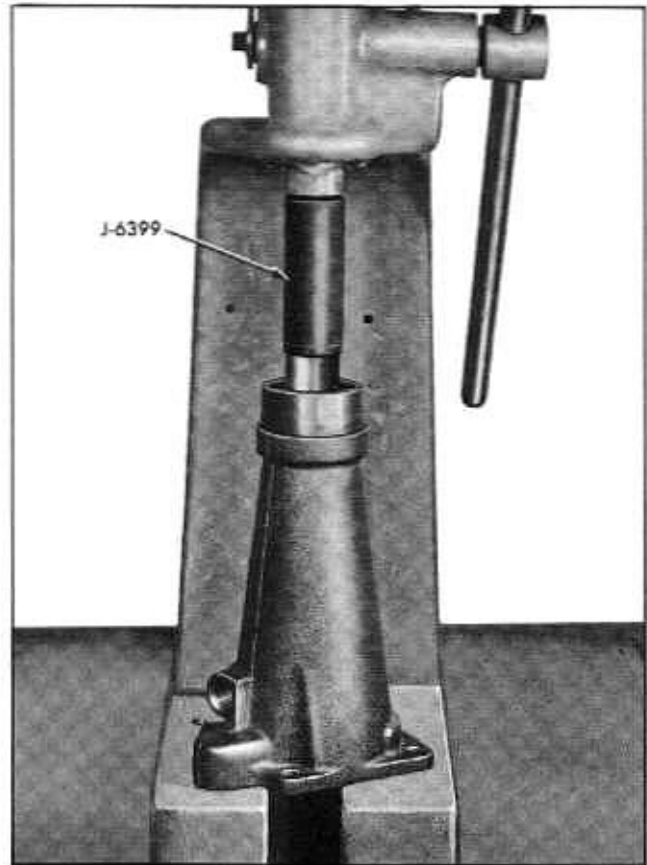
Pressing Bushing into Rear Bearing Retainer
